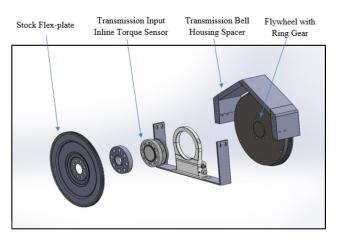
Transmission Inline Torque Sensor and Spacers Assembly
